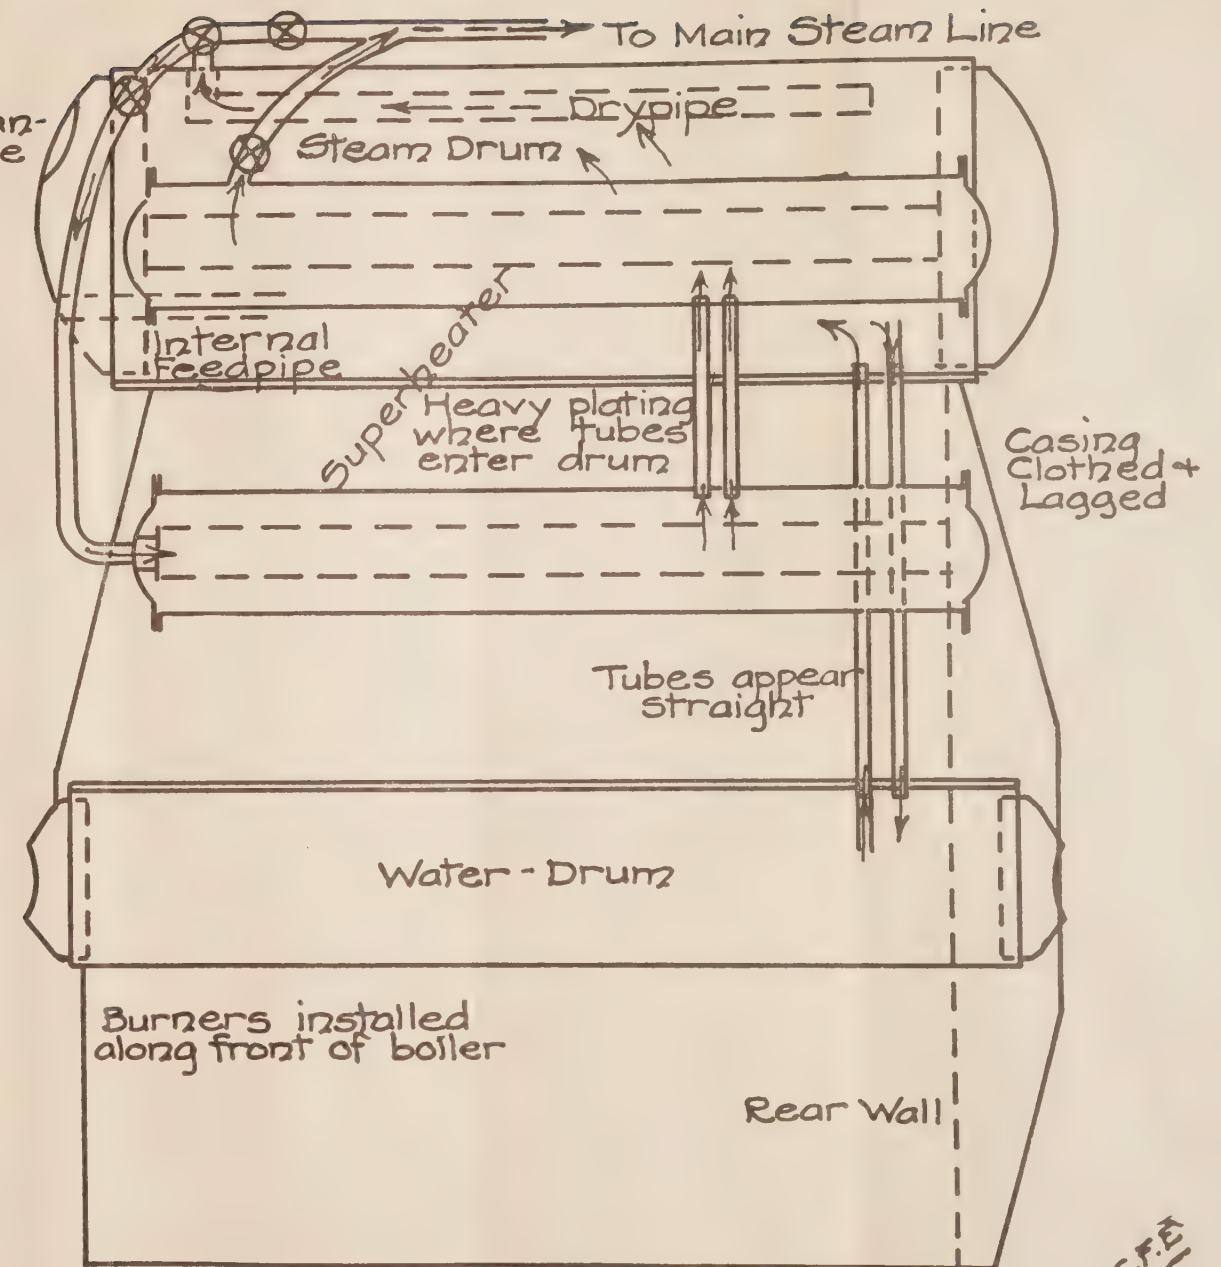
Outline Sketch of Bureau Express Type Boiler (Dyson Design).
